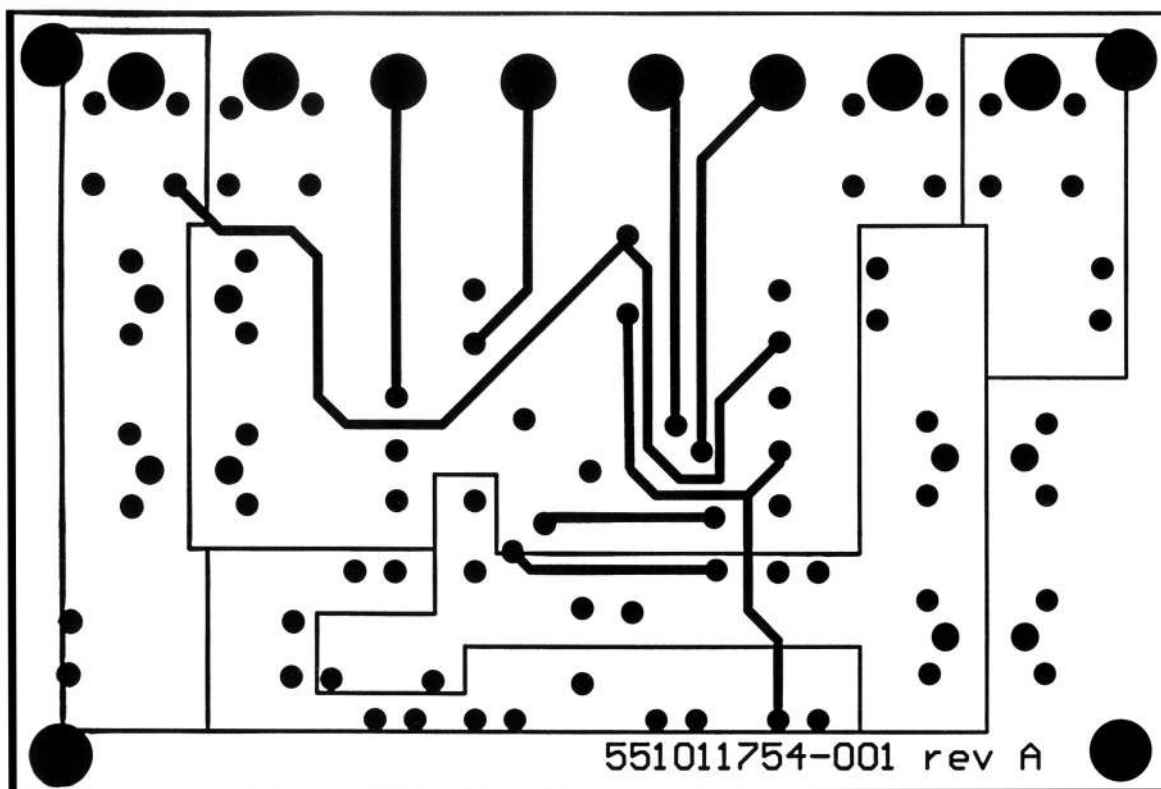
PCB Bottom Layer and Internal Power Plane
